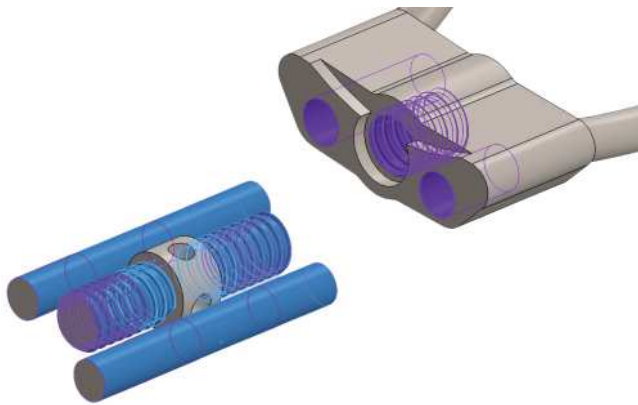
Contact surfaces of threaded spindle and stabilizing guide-bars with their slot
